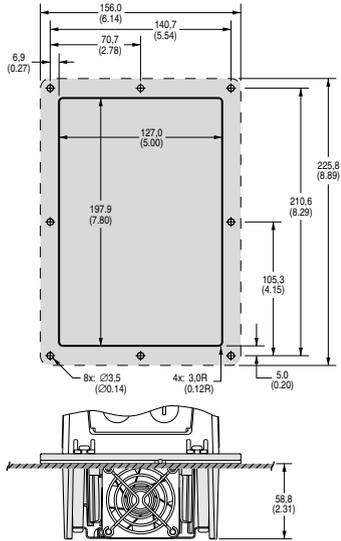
PowerFlex 70 Flange Mount Bottom View Dimensions
